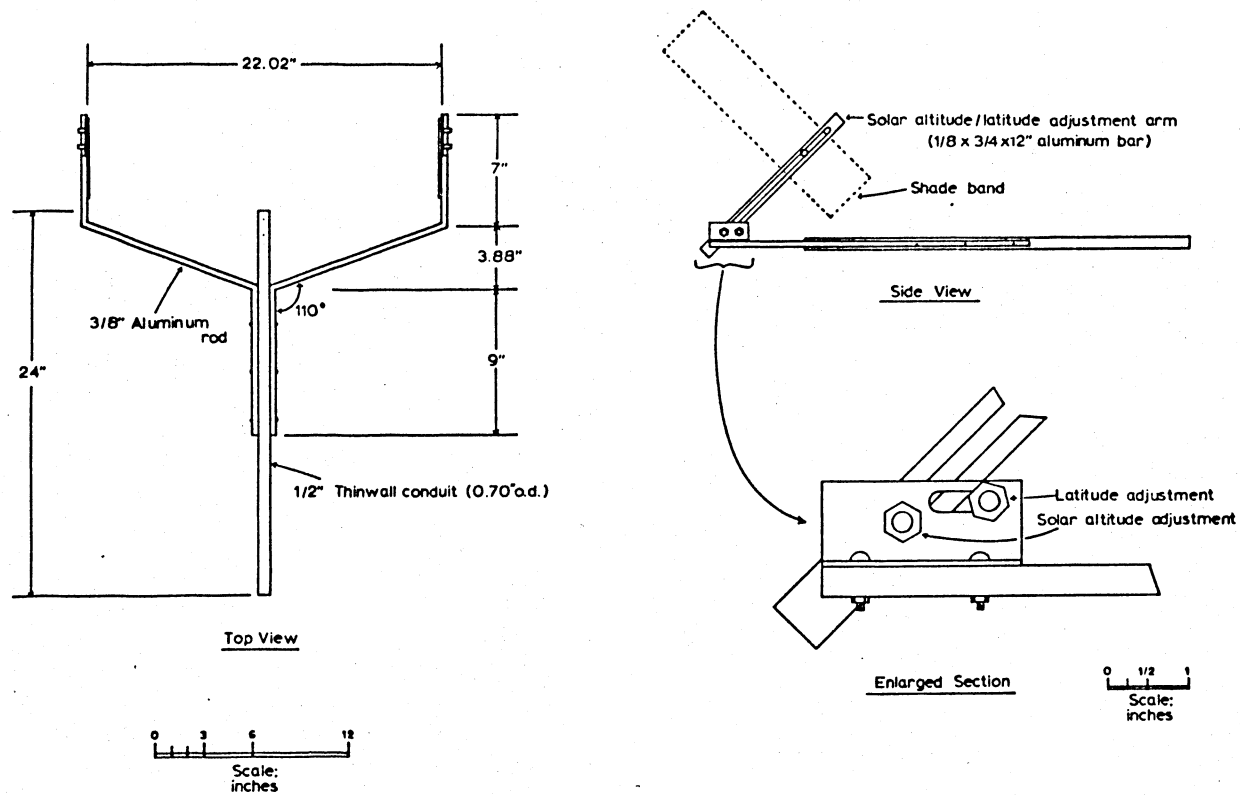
Construction detail of the solar radiometer shade band frame. (See also Fig. A-2.)
